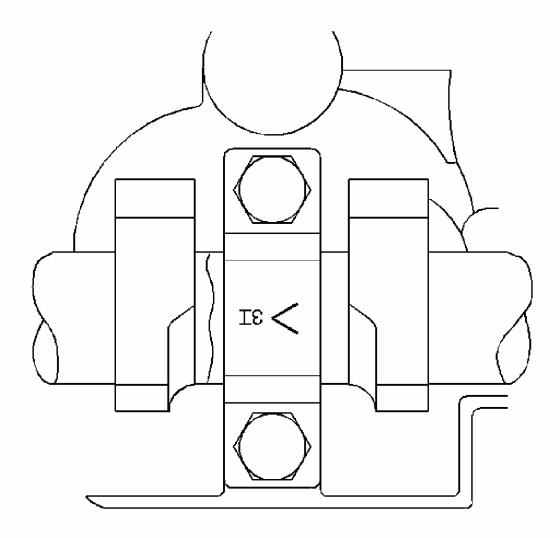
Identifying Camshaft Bearing Cap Markings Courtesy of GENERAL MOTORS CORP.
